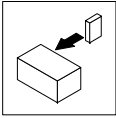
Dimensions 8211 - 8214: Standard assembly
